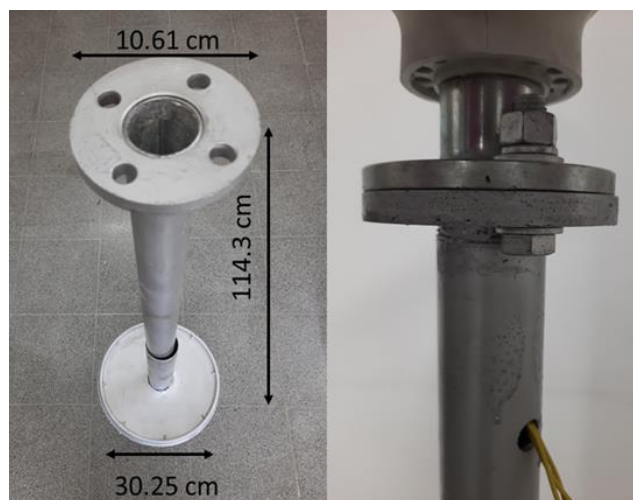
Base and Pole (left) Turbine mounted on flange (right)
